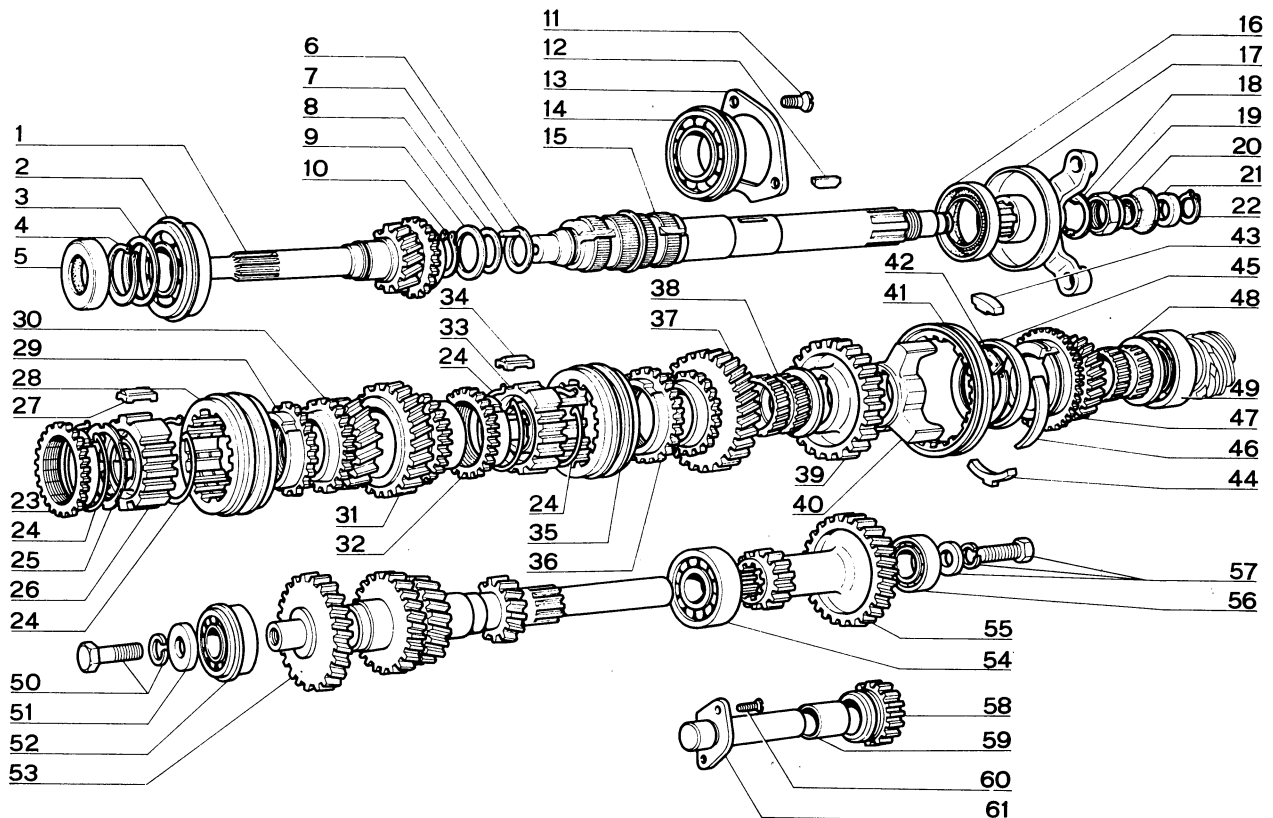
1500 and 1600 S Cabriolet transmission components.
